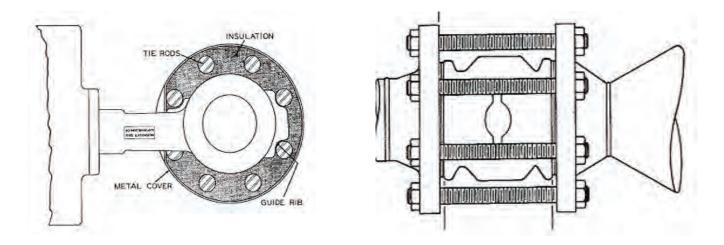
Typical Wafer-style (flangeless) Valve Installation
